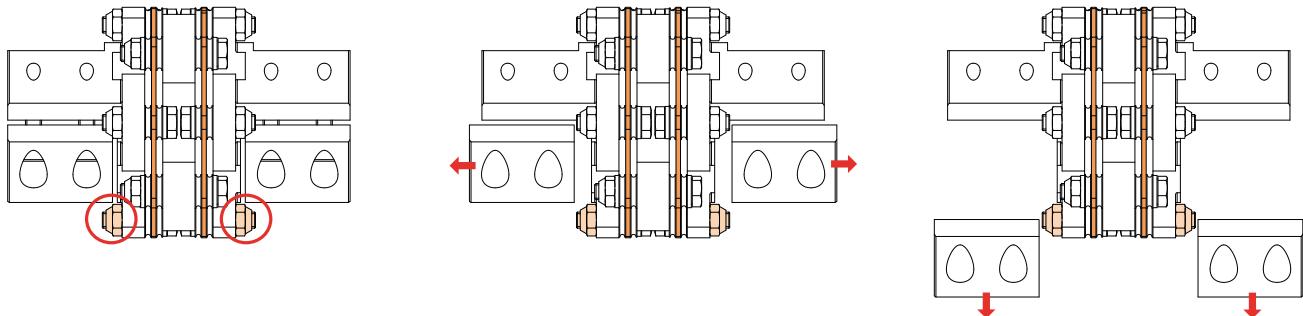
Axial displacement of the half-shells during radial assembly/disassembly
